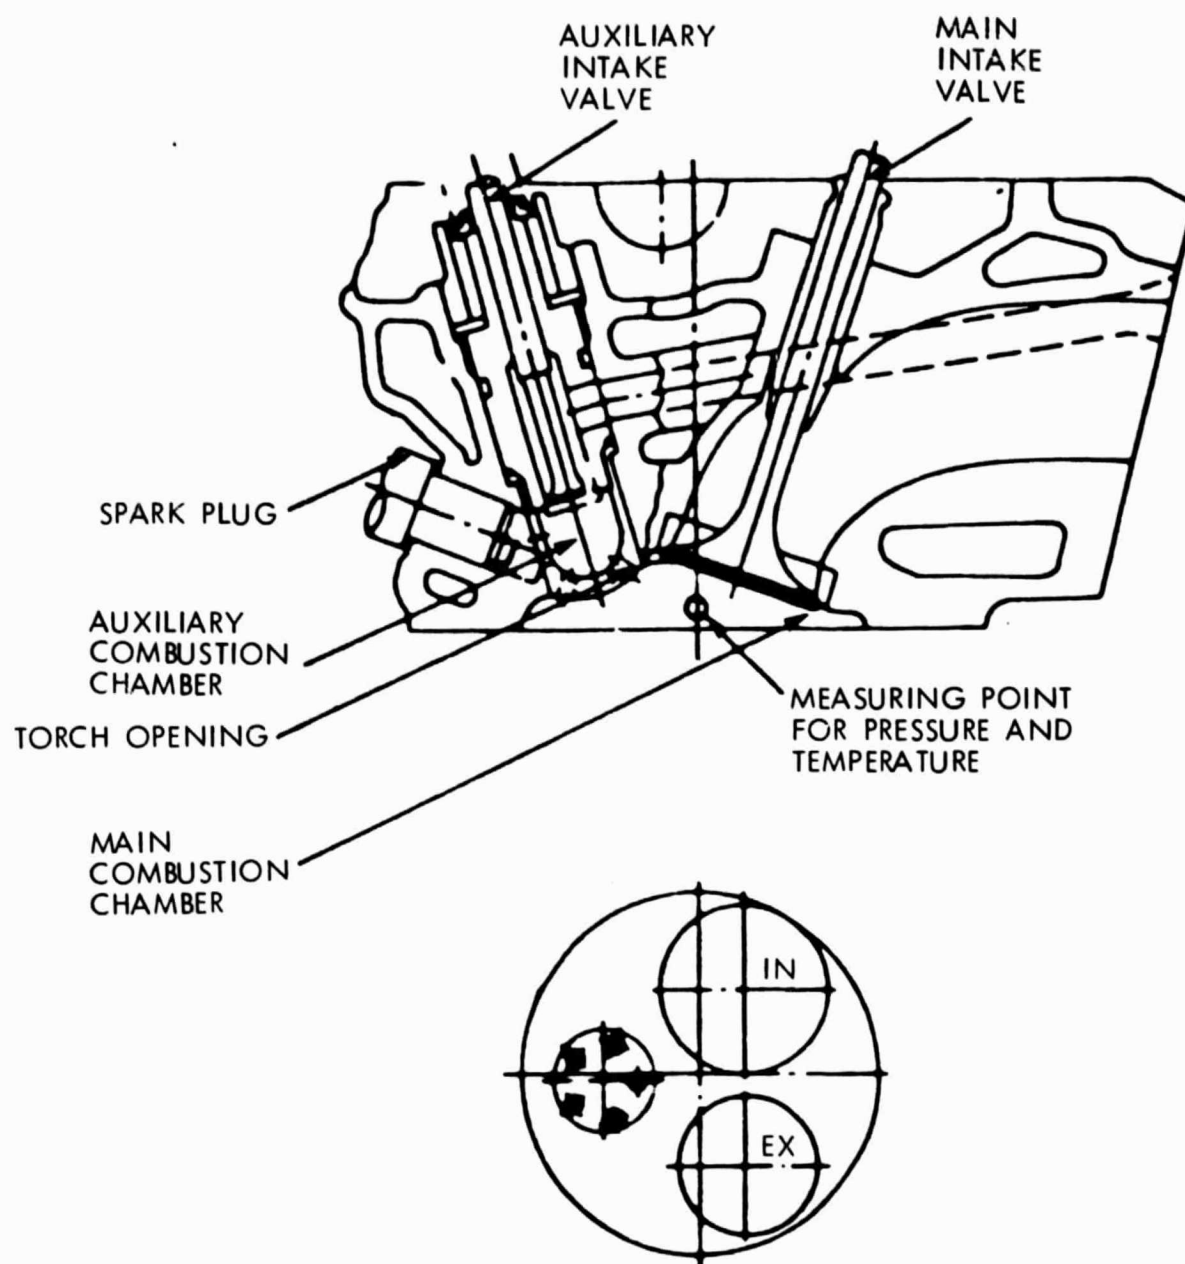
Cross Section of the New CVCC Engine Cylinder Head (Ref. 57)
